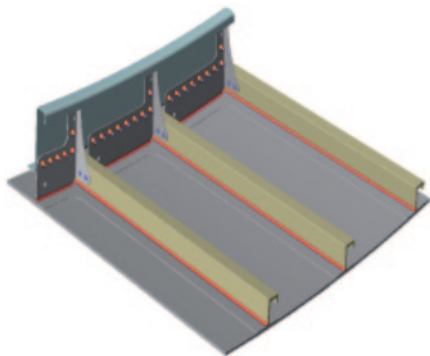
Laser beam welded Al-alloy fuselage part demonstrating LBW joints of skin-stringers (already flying) and skin-clip (future application) (Reproduced courtesy: AIRBUS)
